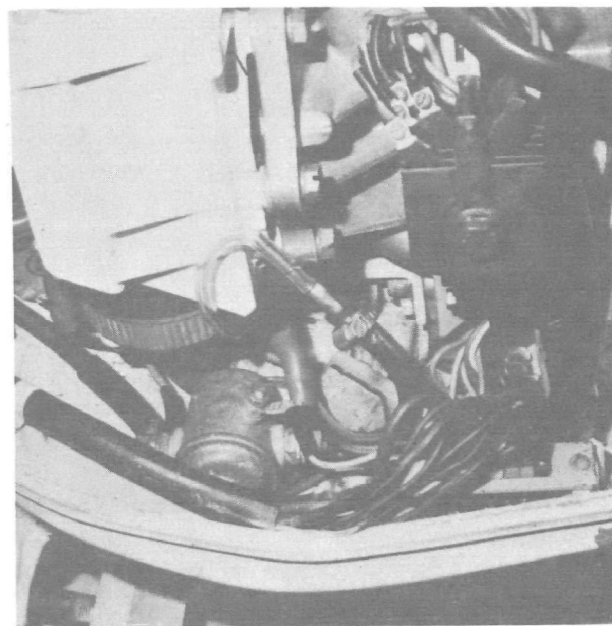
Crankcase drain tube for engine 6, plus (transparent) collection tube and gas return tube
